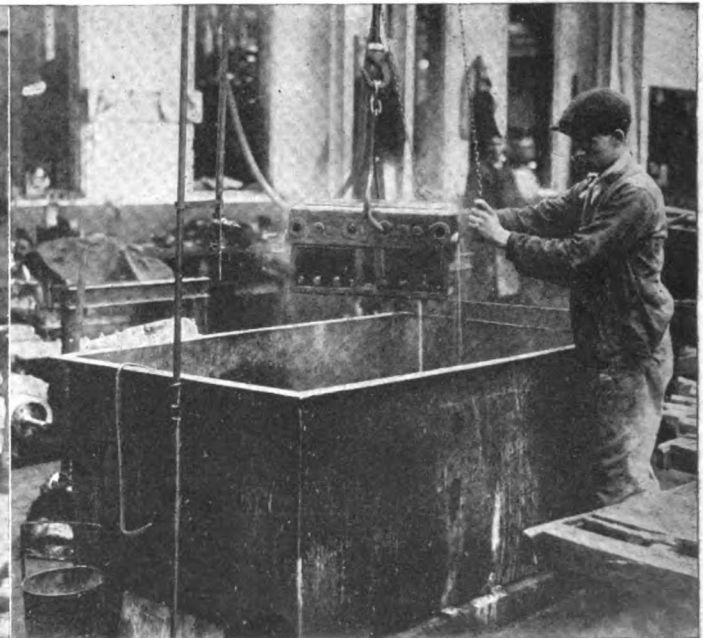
Cleaning gray iron cylinder blocks for motor assembly track
